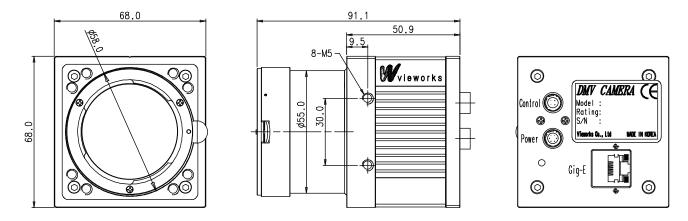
VH-5MG Mechanical Dimension (F-Mount)
